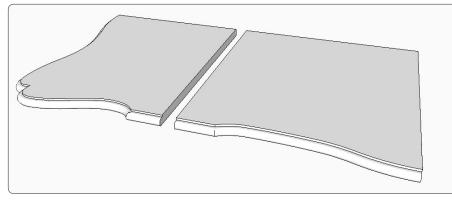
Begin designing the rule joint on edges that will be the center of the tabletop and leaf.
